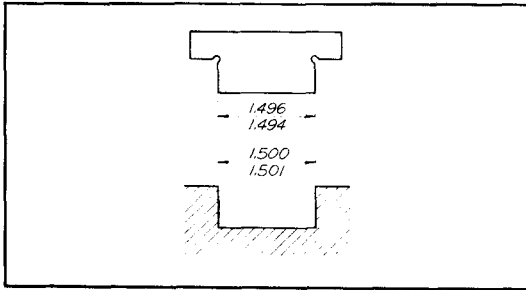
An example of limit dimensioning. Tolerance on tongue, 0.002 in.; tolerance on groove, 0.001 in.; min. clearance, 0.004 in.
